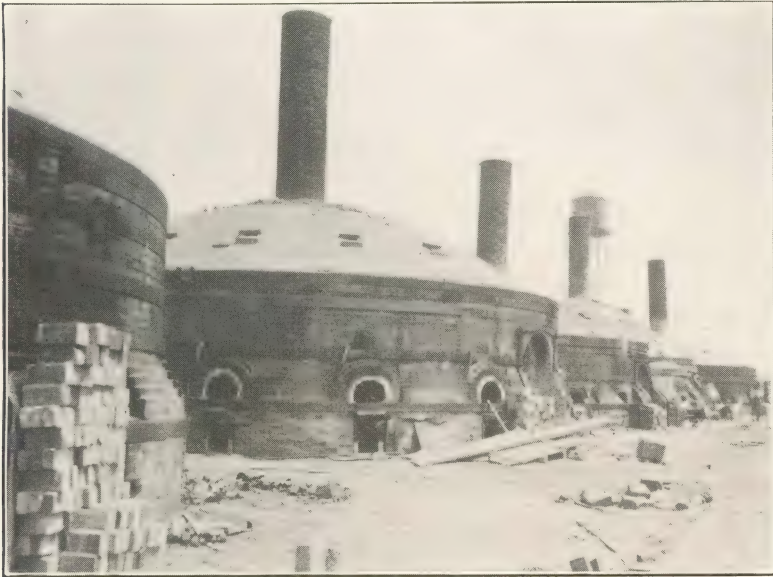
Kilns at Louisville Fire Brick Works, Highland Park.
